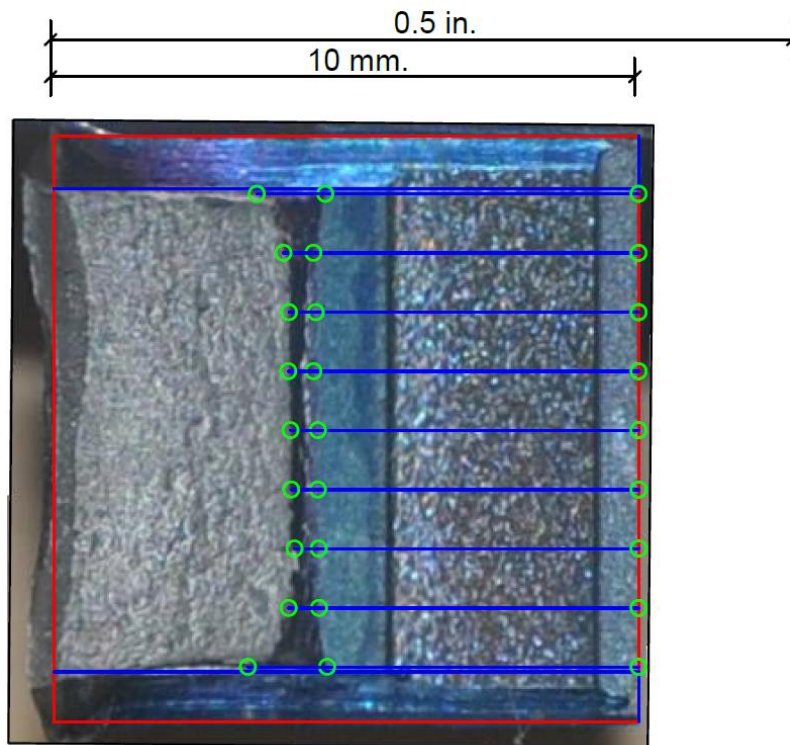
Specimen A10' Fracture Surface
